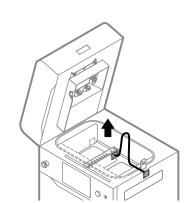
Drag out the plate without spring above the Recoater's roller.
